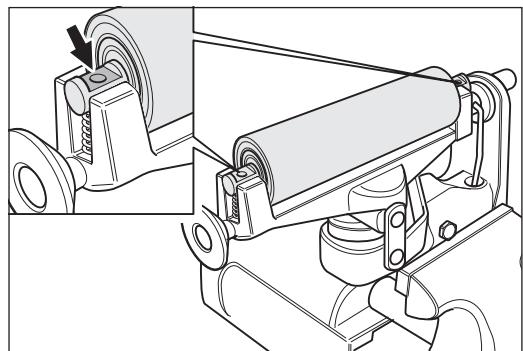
Insert the new tensioning roller, ensuring that the surfaces on the shaft ends are pointing upwards.
